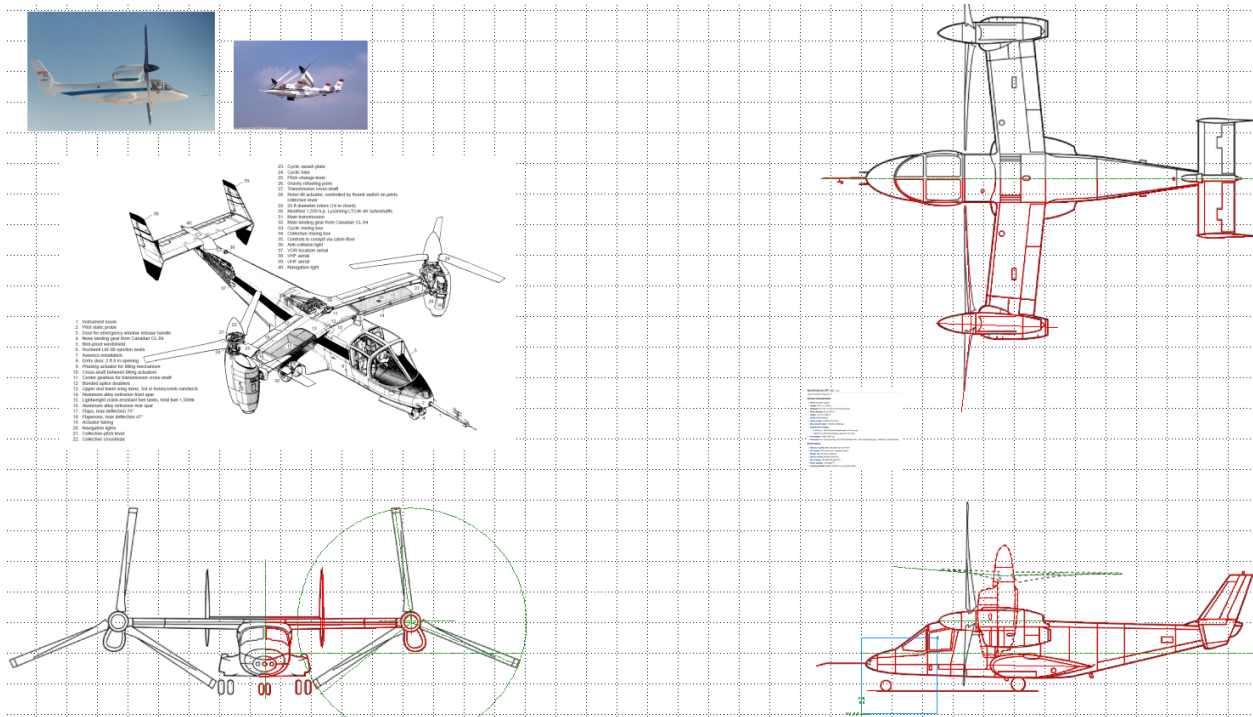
XV-15 Three-View Drawing Created From Smaller Drawings (ref. 7).
